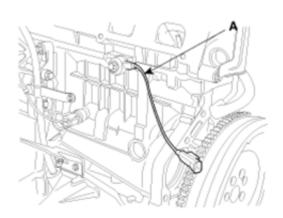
Identifying Oil Pressure Sensor Courtesy of KIA MOTORS AMERICA, INC.
